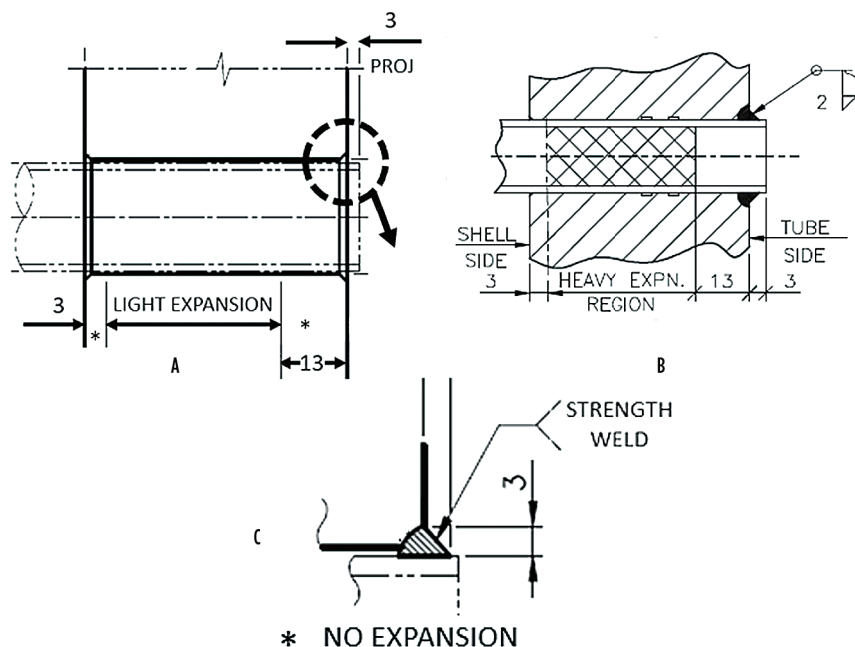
Tube-to-tubesheet joint details: welded with light expansion (A) and expanded with two grooves (B).
